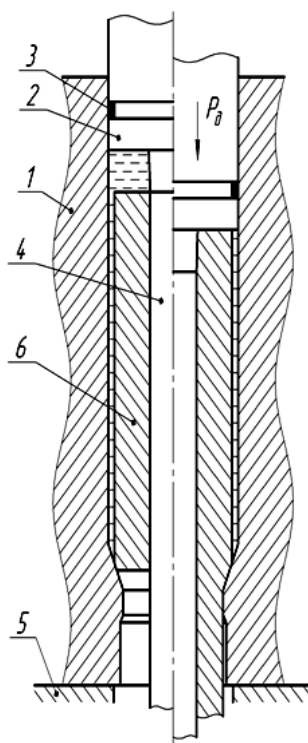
Scheme of hydraulic forging of tubular blanks on mandrel / *Схема гидропрессования трубчатых заготовок на оправке
